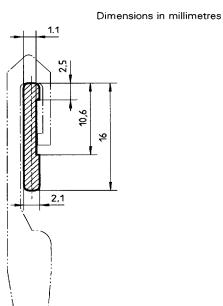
Cross-section of heald-carrying rod for flat steel healds with J-shaped end loops
